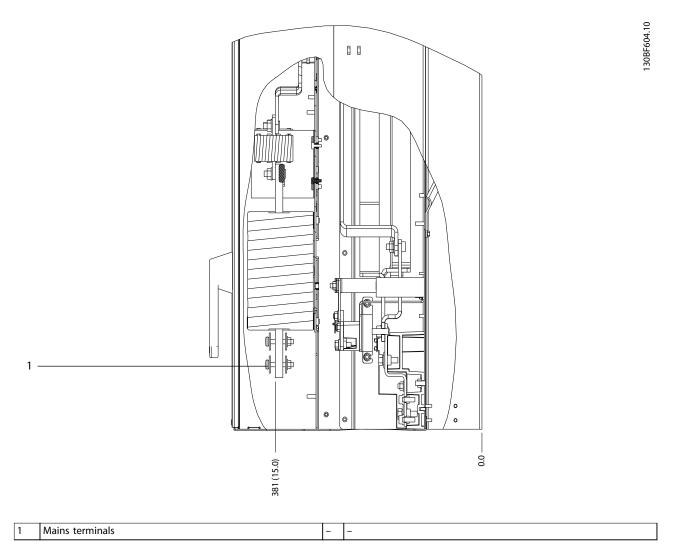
Terminal Dimensions for E2 with Disconnect (380–480/500 V Models: P315; 525–690 V Models: P355–P560), Side View
